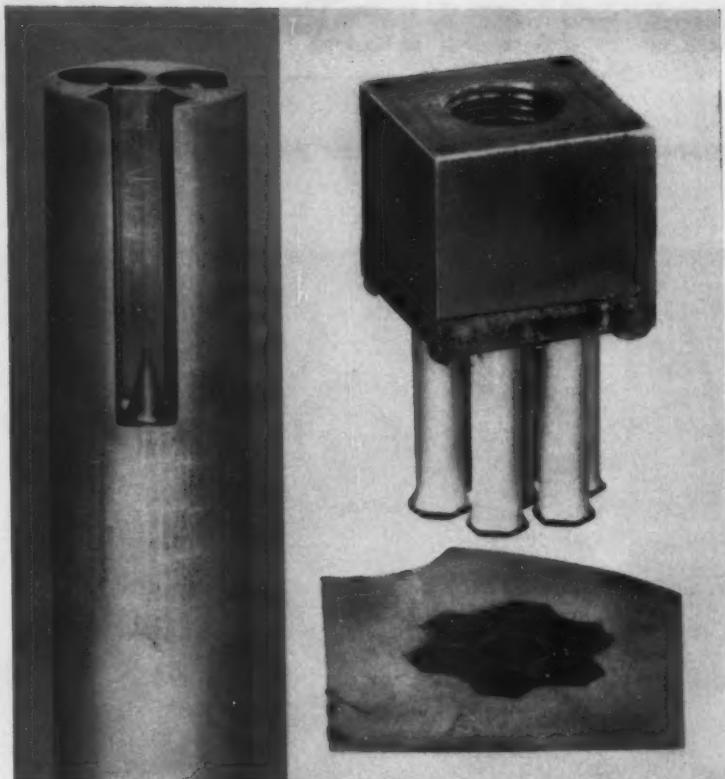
(Left) Very tough high-temperature Udimet 700 alloy test piece showing hexagonal hole breaking through side produced on machine shown in Fig. 1. Straight sides of hole indicate freedom from tool erosion. (Right) Multiple-tool electrodes in single header produce a number of cavities simultaneously
